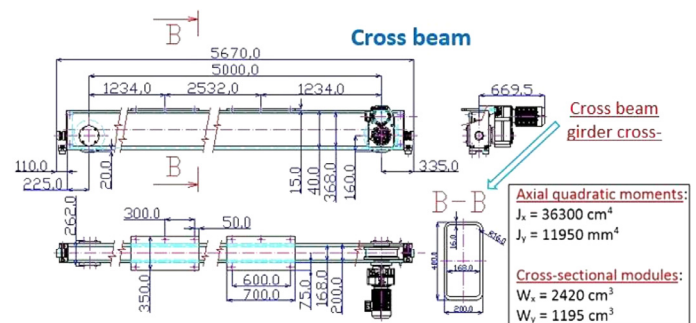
Cross beam of the two-girder bridge crane 2 × 6.3 t-31.5 m.
